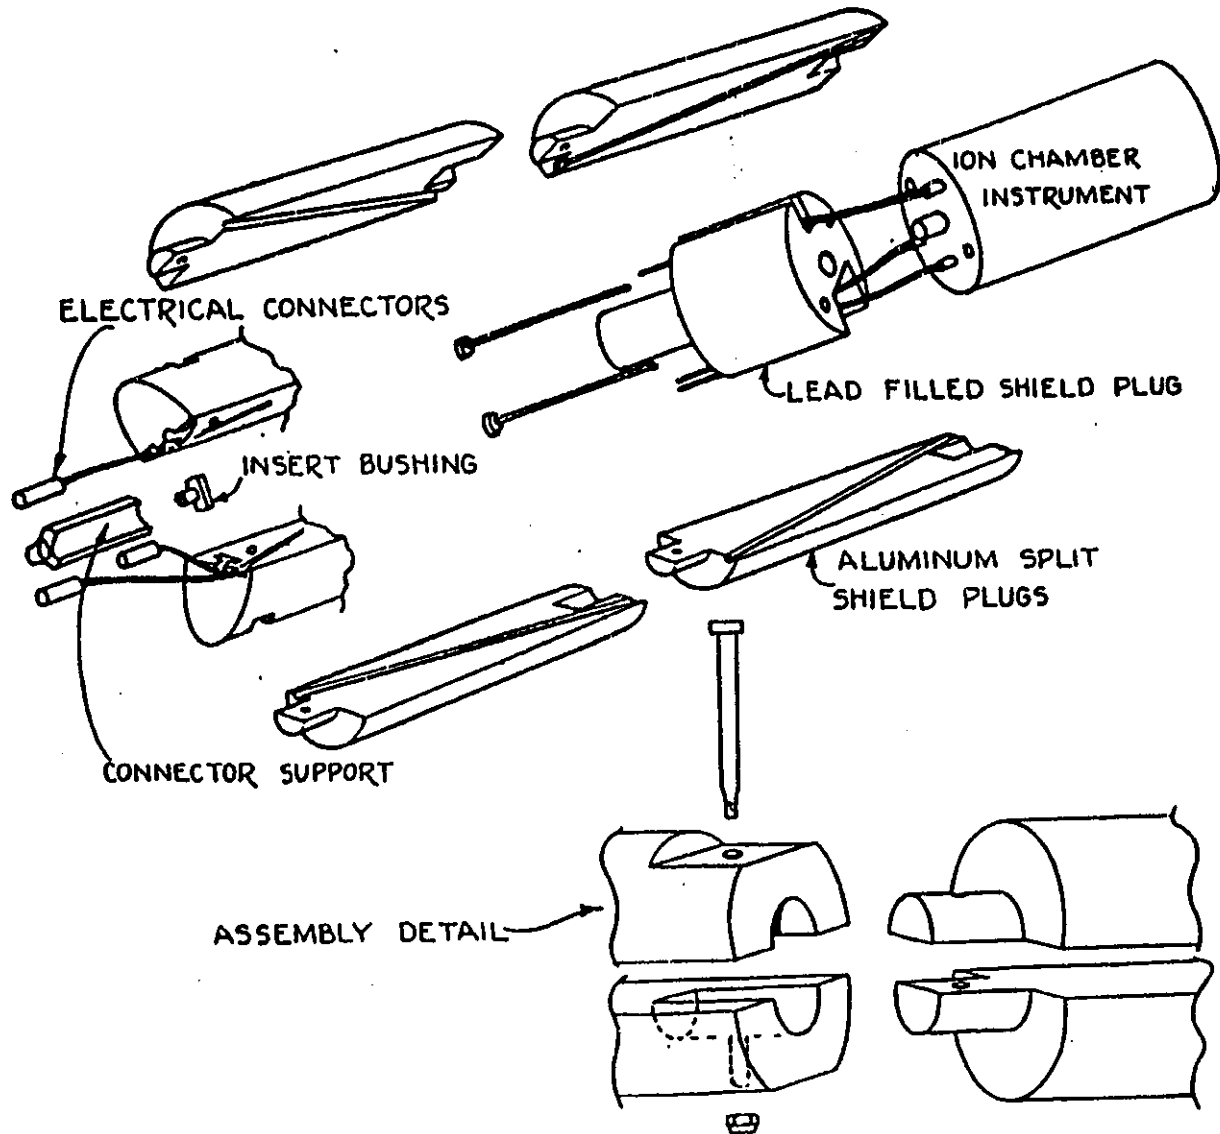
Exploded View of Ion Chamber Internal Parts
